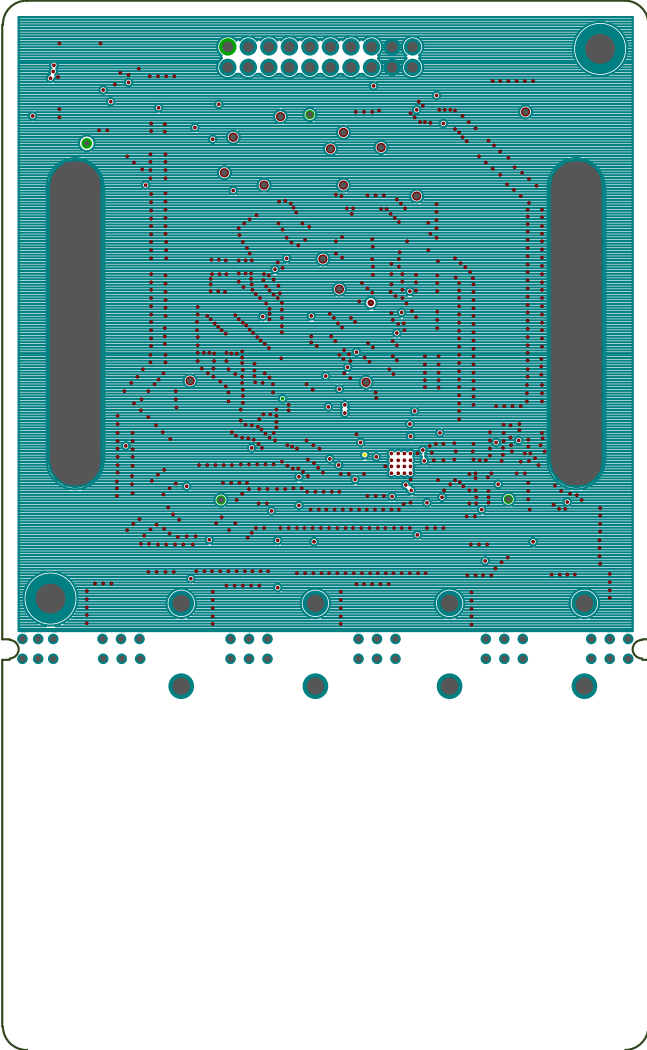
EVAL-ADPD7000Z PCB Layout: GND 1
